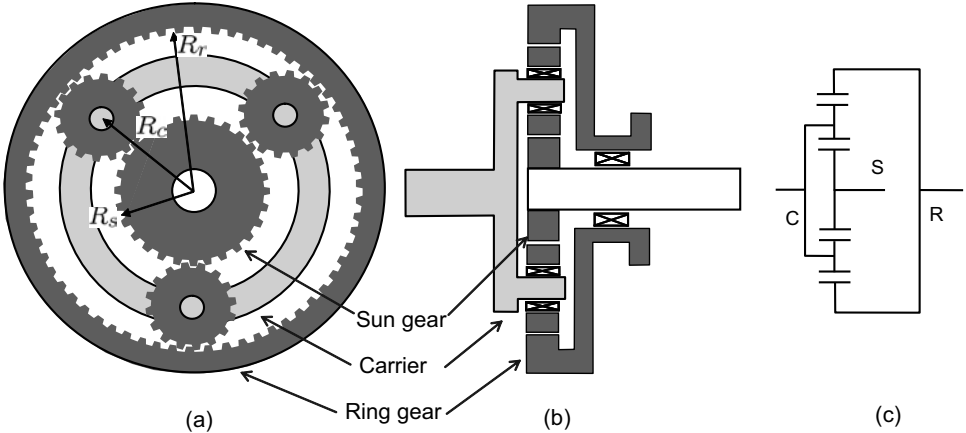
Planetary gear: (a) front view, (b) side view, (c) symbol.
